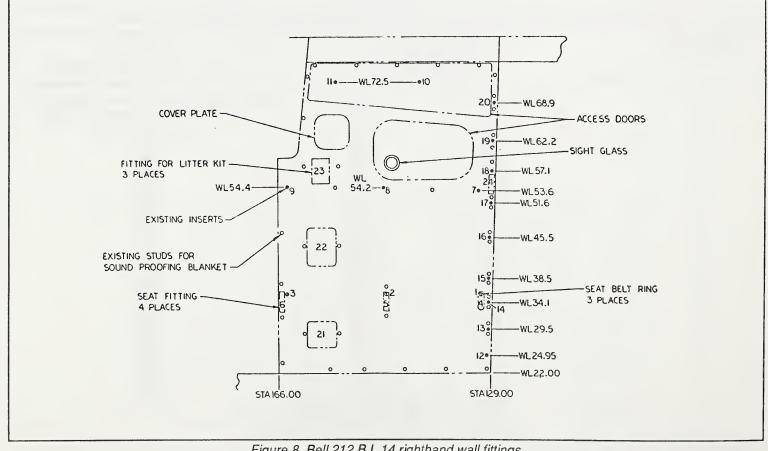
Bell 212 B.L.14 righthand wall fittings.
